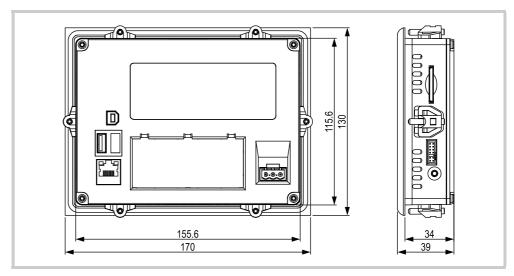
Mechanical dimensions of the 5.7" devices in mm
